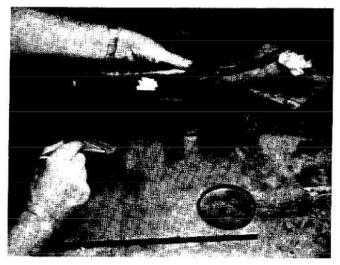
Magnetic Slurry Indications of Surface Cracks in Weldment (Produced by Yoke Magnetization, AC Continuous)
